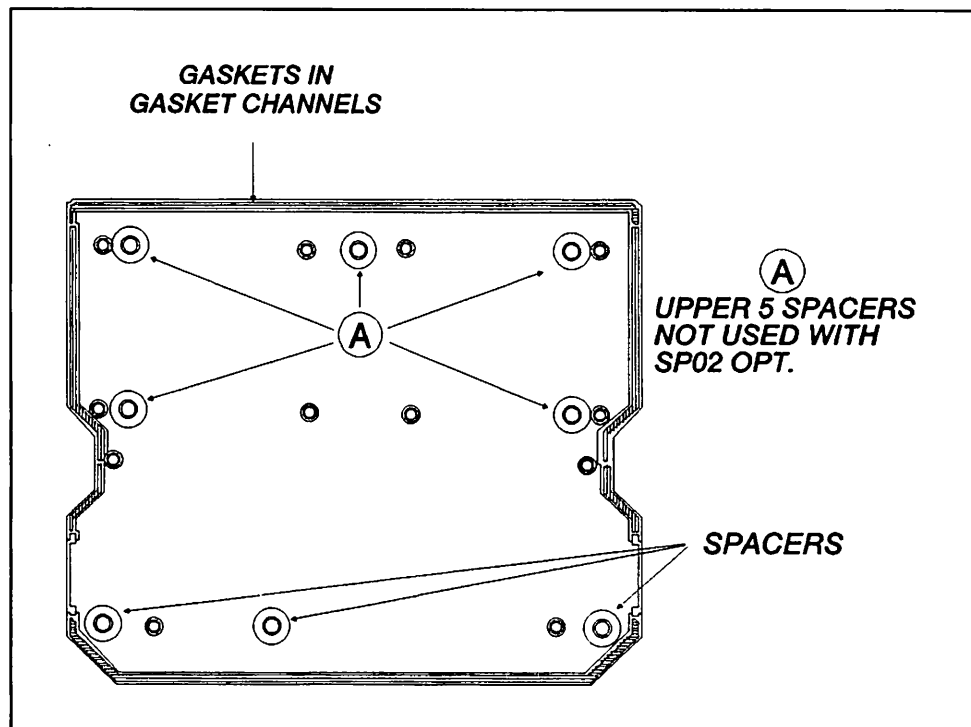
EMP Rear Panel Gasket Channels and Gaskets
